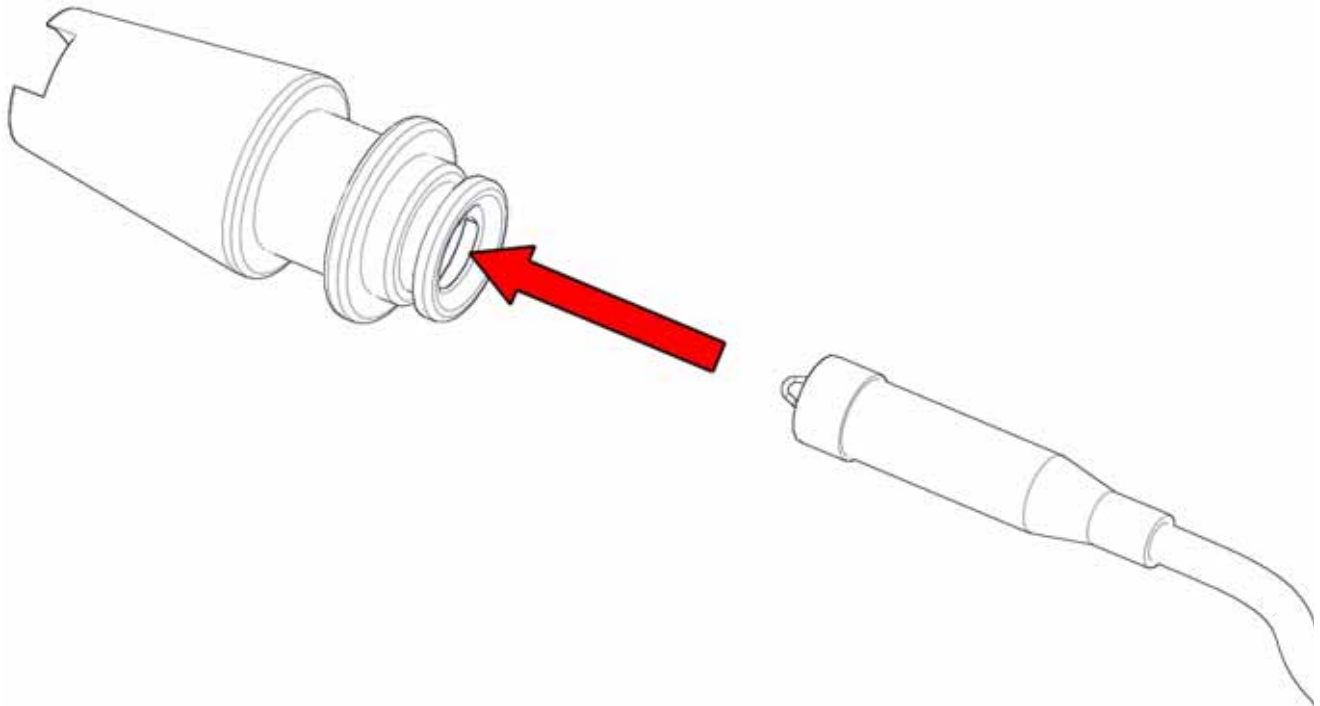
Feeding the burn wire assembly into the metal release housing.
